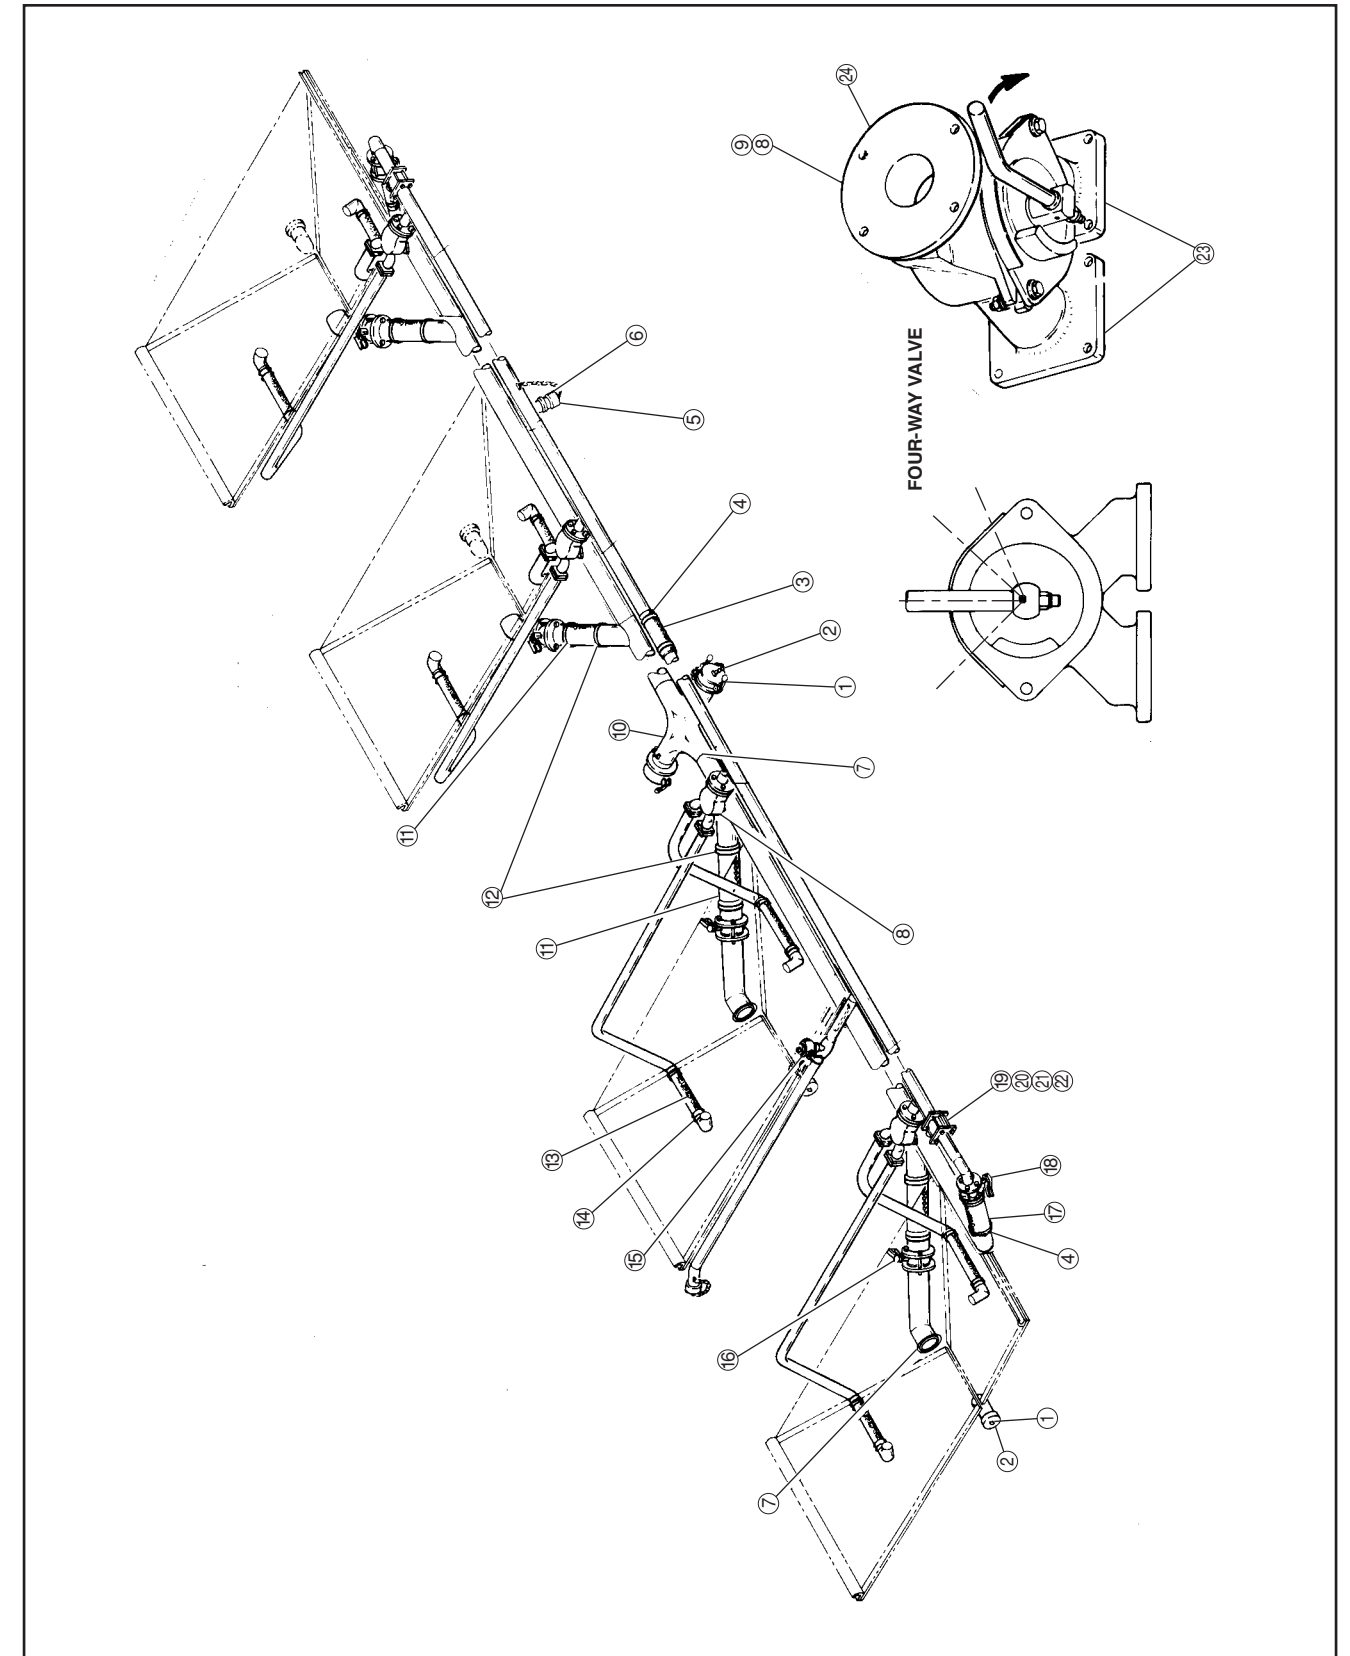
Manifold Assembly With Four-Way Fluidizing Air Valve
